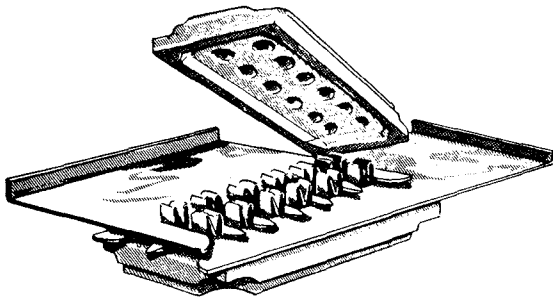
Illustration showing the use of the TDQ contact alignment tools
